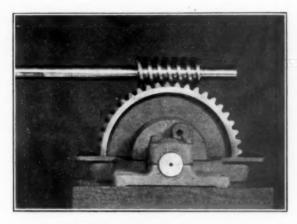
Photograph of Worm and Gear with Upper Part of Case Removed
